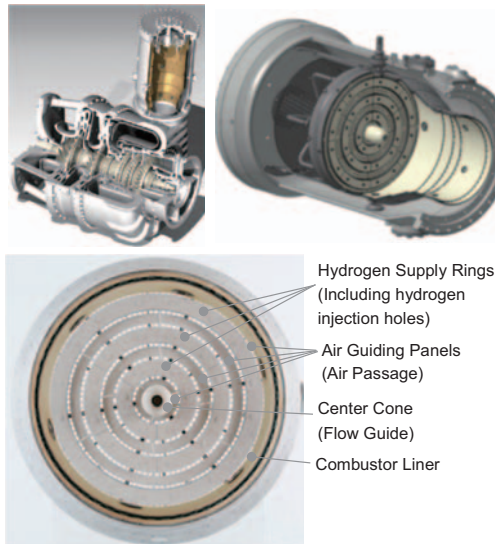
Schematic view of Kawasaki M1A-17 gas turbine, prototype hydrogen DLE combustor and micro-mix burner module
